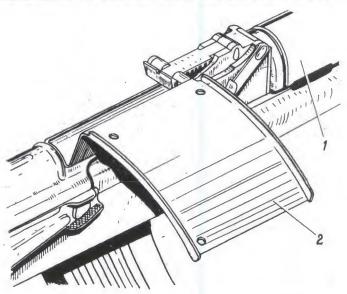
INSTALLATION OF CASE DEFLECTOR ON SUBMACHINE GUN AKM
